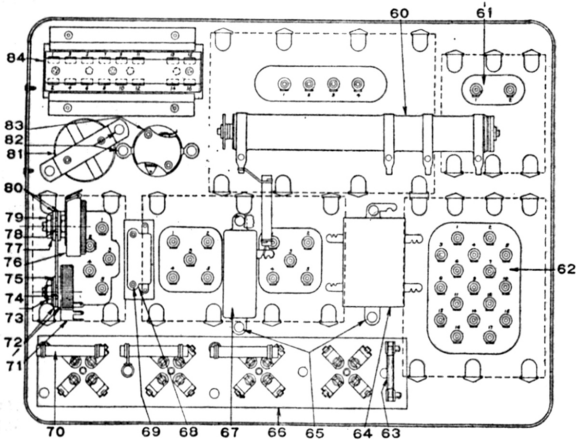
Bottom View of Power Amplifier Unit, Showing Parts
